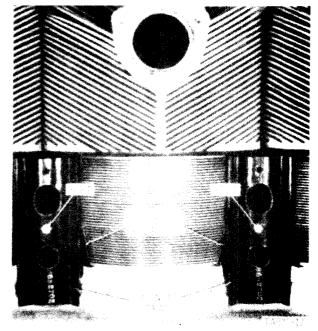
, Removing or installing lower cylinder deflector straps and deflectors right side.
